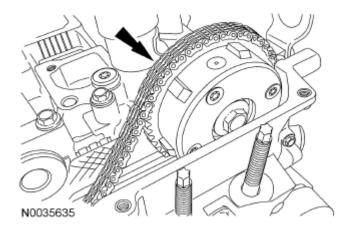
Locating Timing Chain On Intake Camshaft Drive Gear Courtesy of FORD MOTOR CO.
